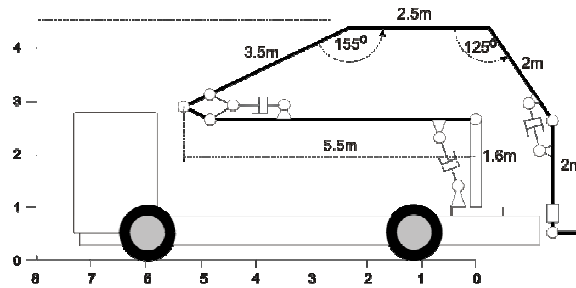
Overall dimensions of the hydraulic robot mounted on the truck.
